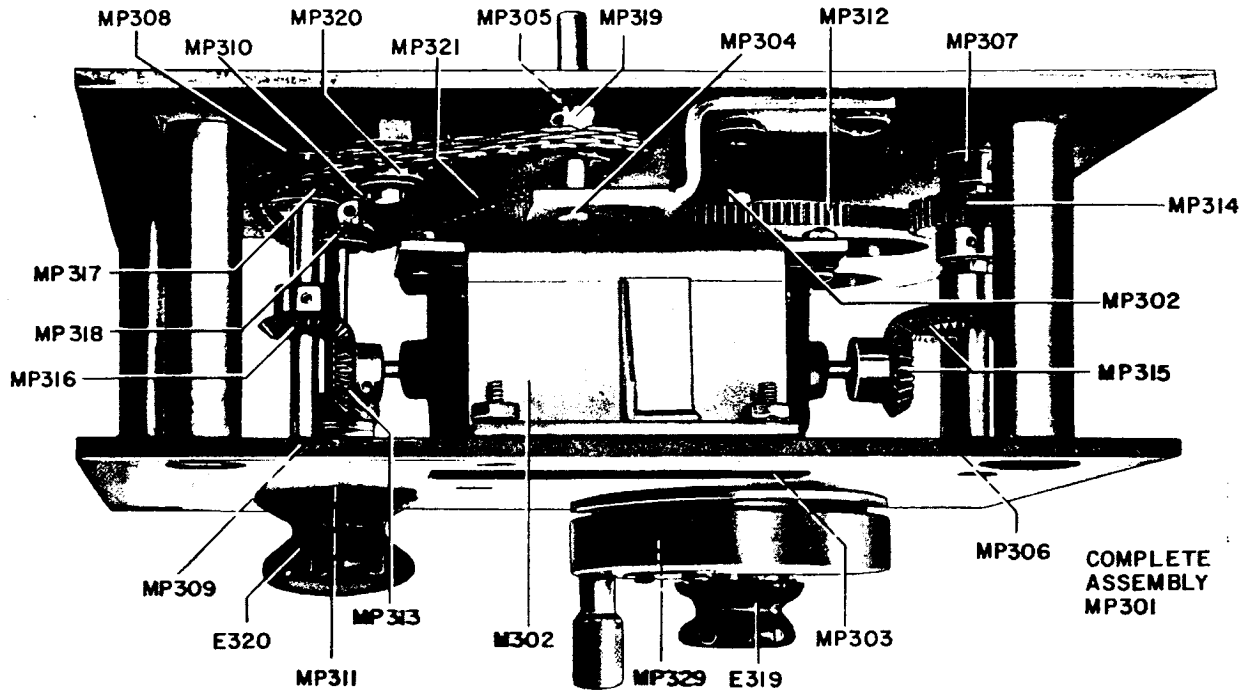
Radio Frequency Oscillator O-621/WRT-1, Master Oscillator Gear Train, Location of Parts
